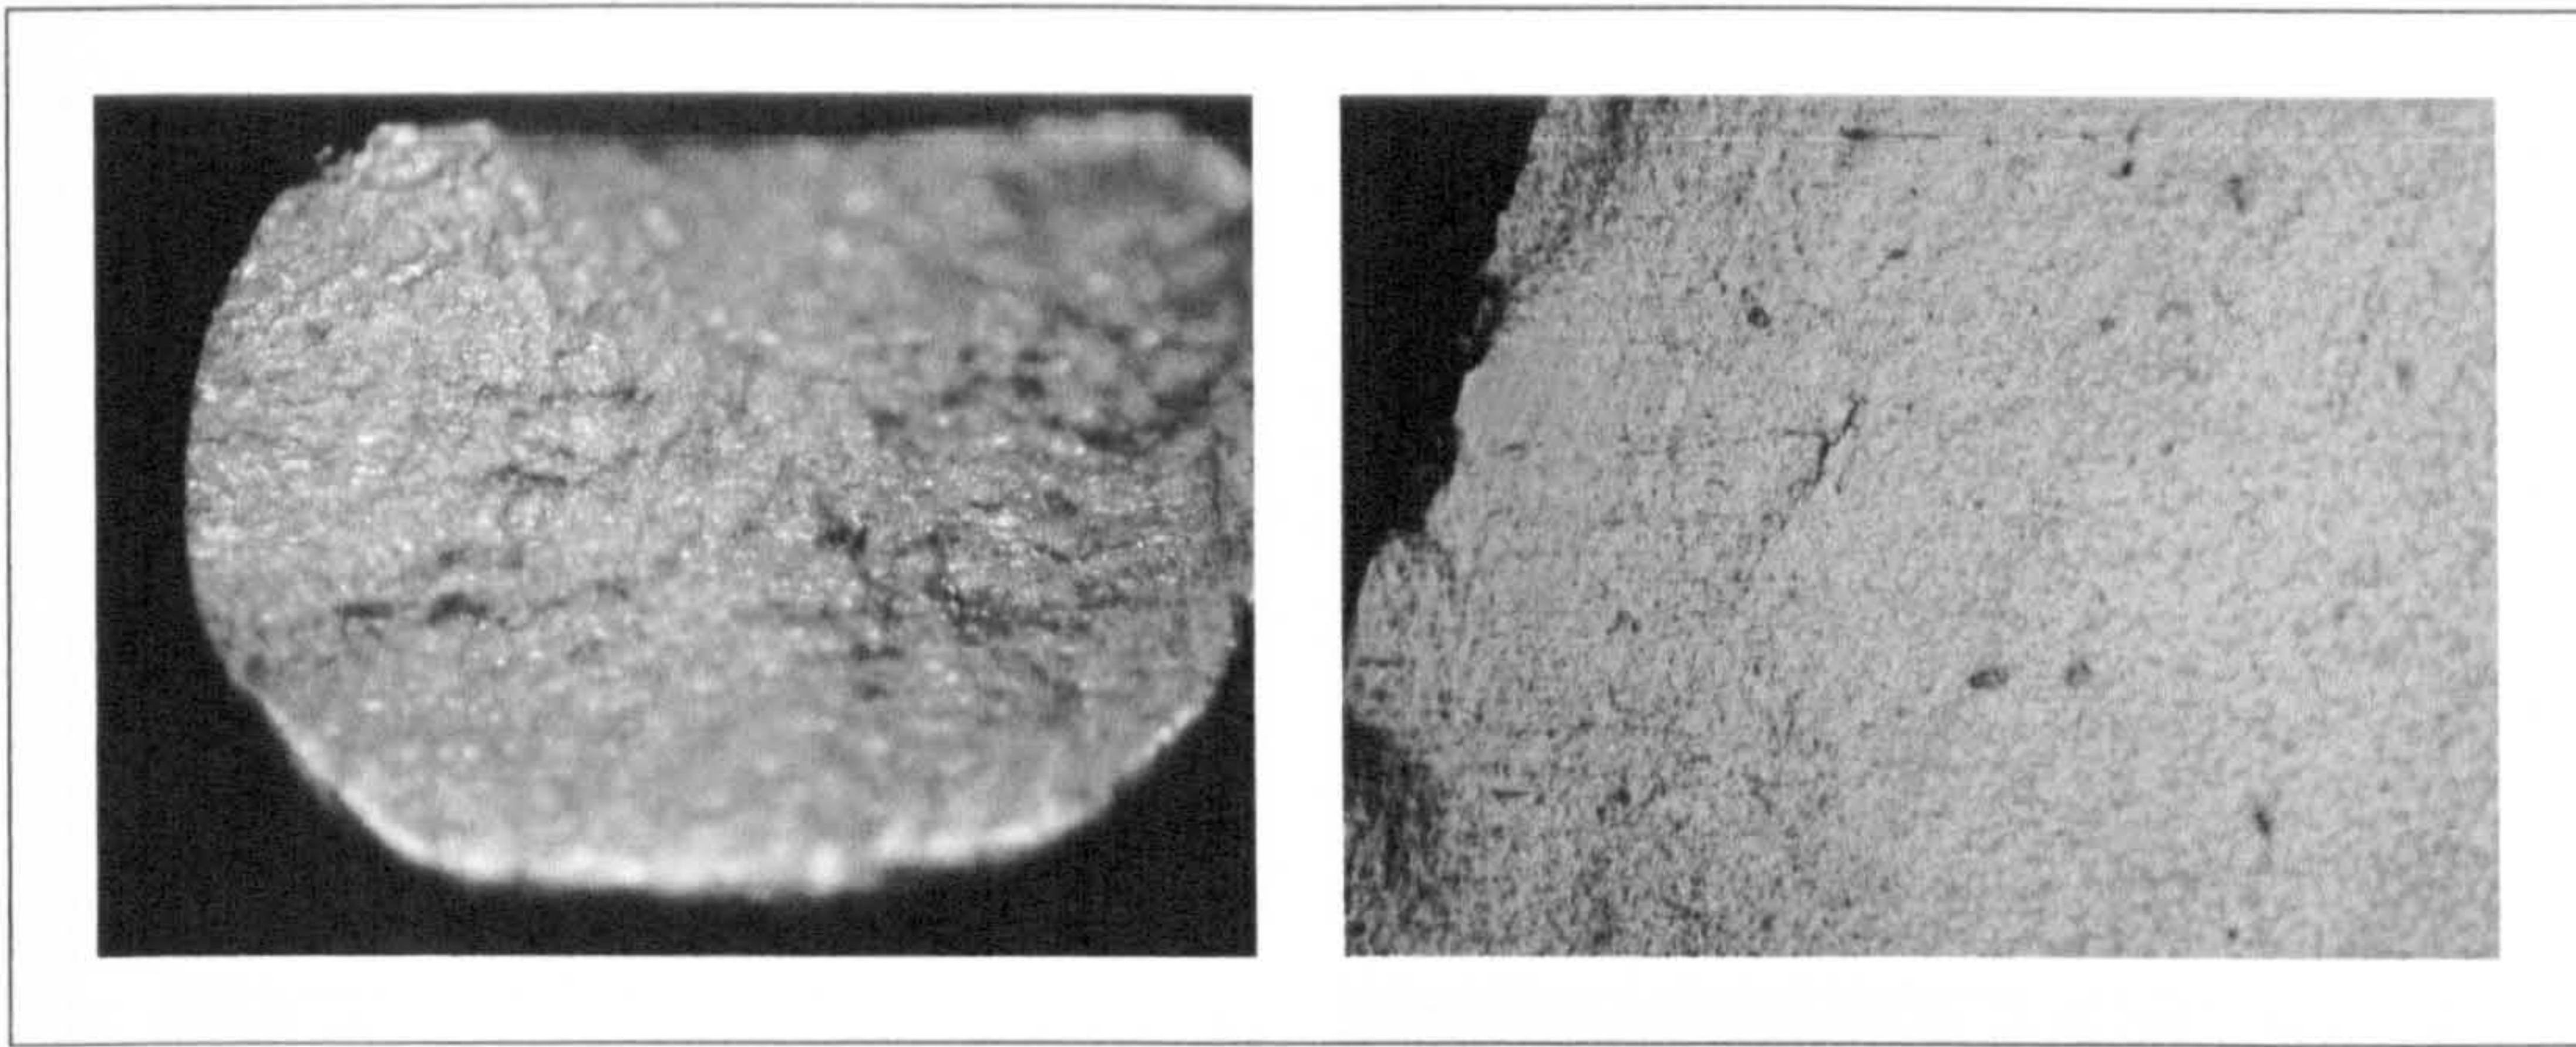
FS SP SCG 19 fracture surface (left) and FS SP SCG 21 notch surface.
